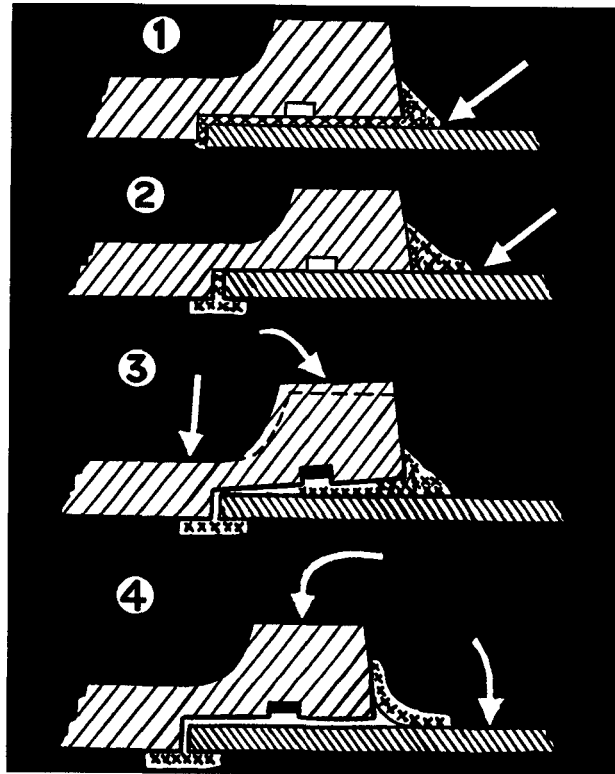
Steps to braze a socket joint: (1) At the start, the clearance area is filled with flux. (2) Tube is heated and flux flows out; clearance area is closed and the braze alloy contacts the heated tube surface. (3) Fitting is heated and clearance area opens. Flux and alloy flow out. (4) Both tube and fitting are then heated by wiping motion. As alloy flows out it penetrates the surfaces and forms a fillet around the edge of the fitting.
